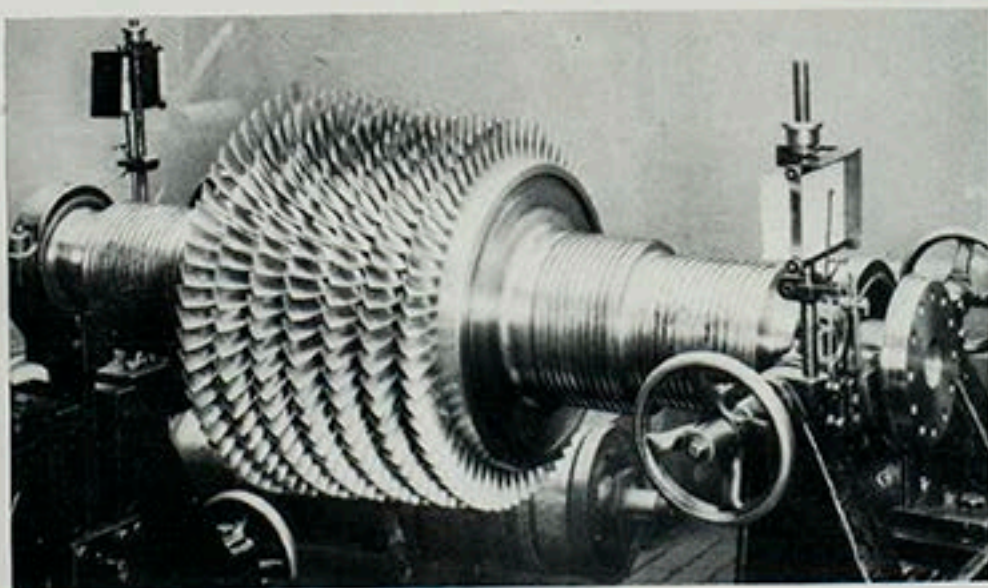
High-pressure turbine rotor undergoing balancing tests.
